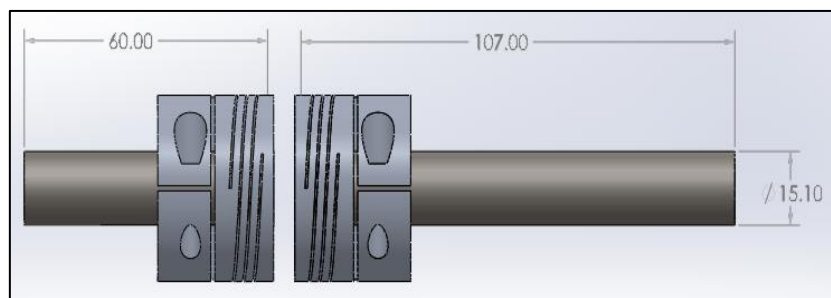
3D model and dimensions of spiral coupling – shafts system in millimeters.
